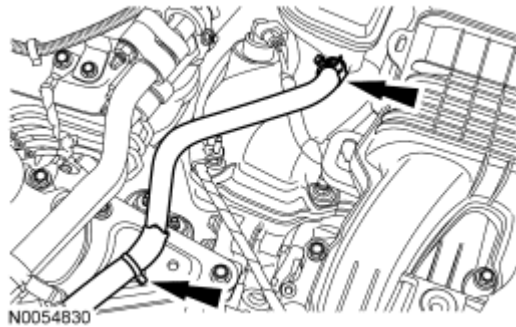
Identifying Pin-Type Retainer From Engine Mount Brace
